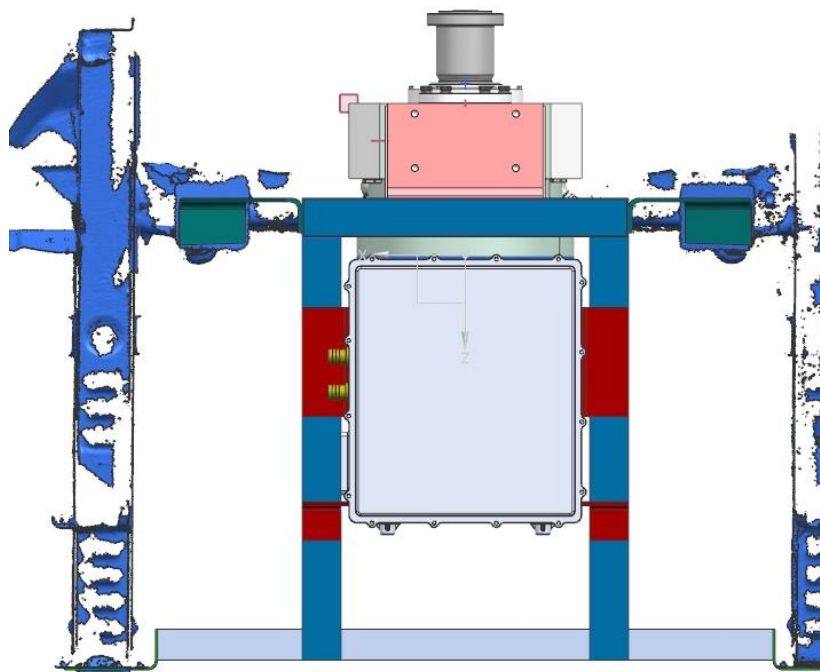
Top view of the powertrain sub frame with the motor and gearbox assembled. In red the 3 flanges that we have designed in steel to support the motor
